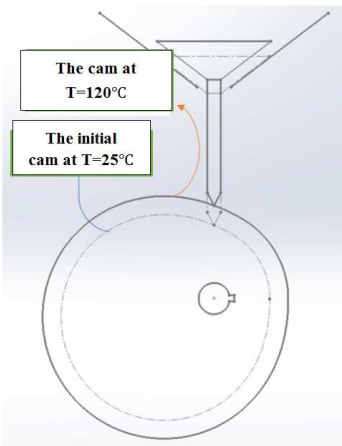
A cam-follower mechanism in contact with a valve after the temperature rise.
